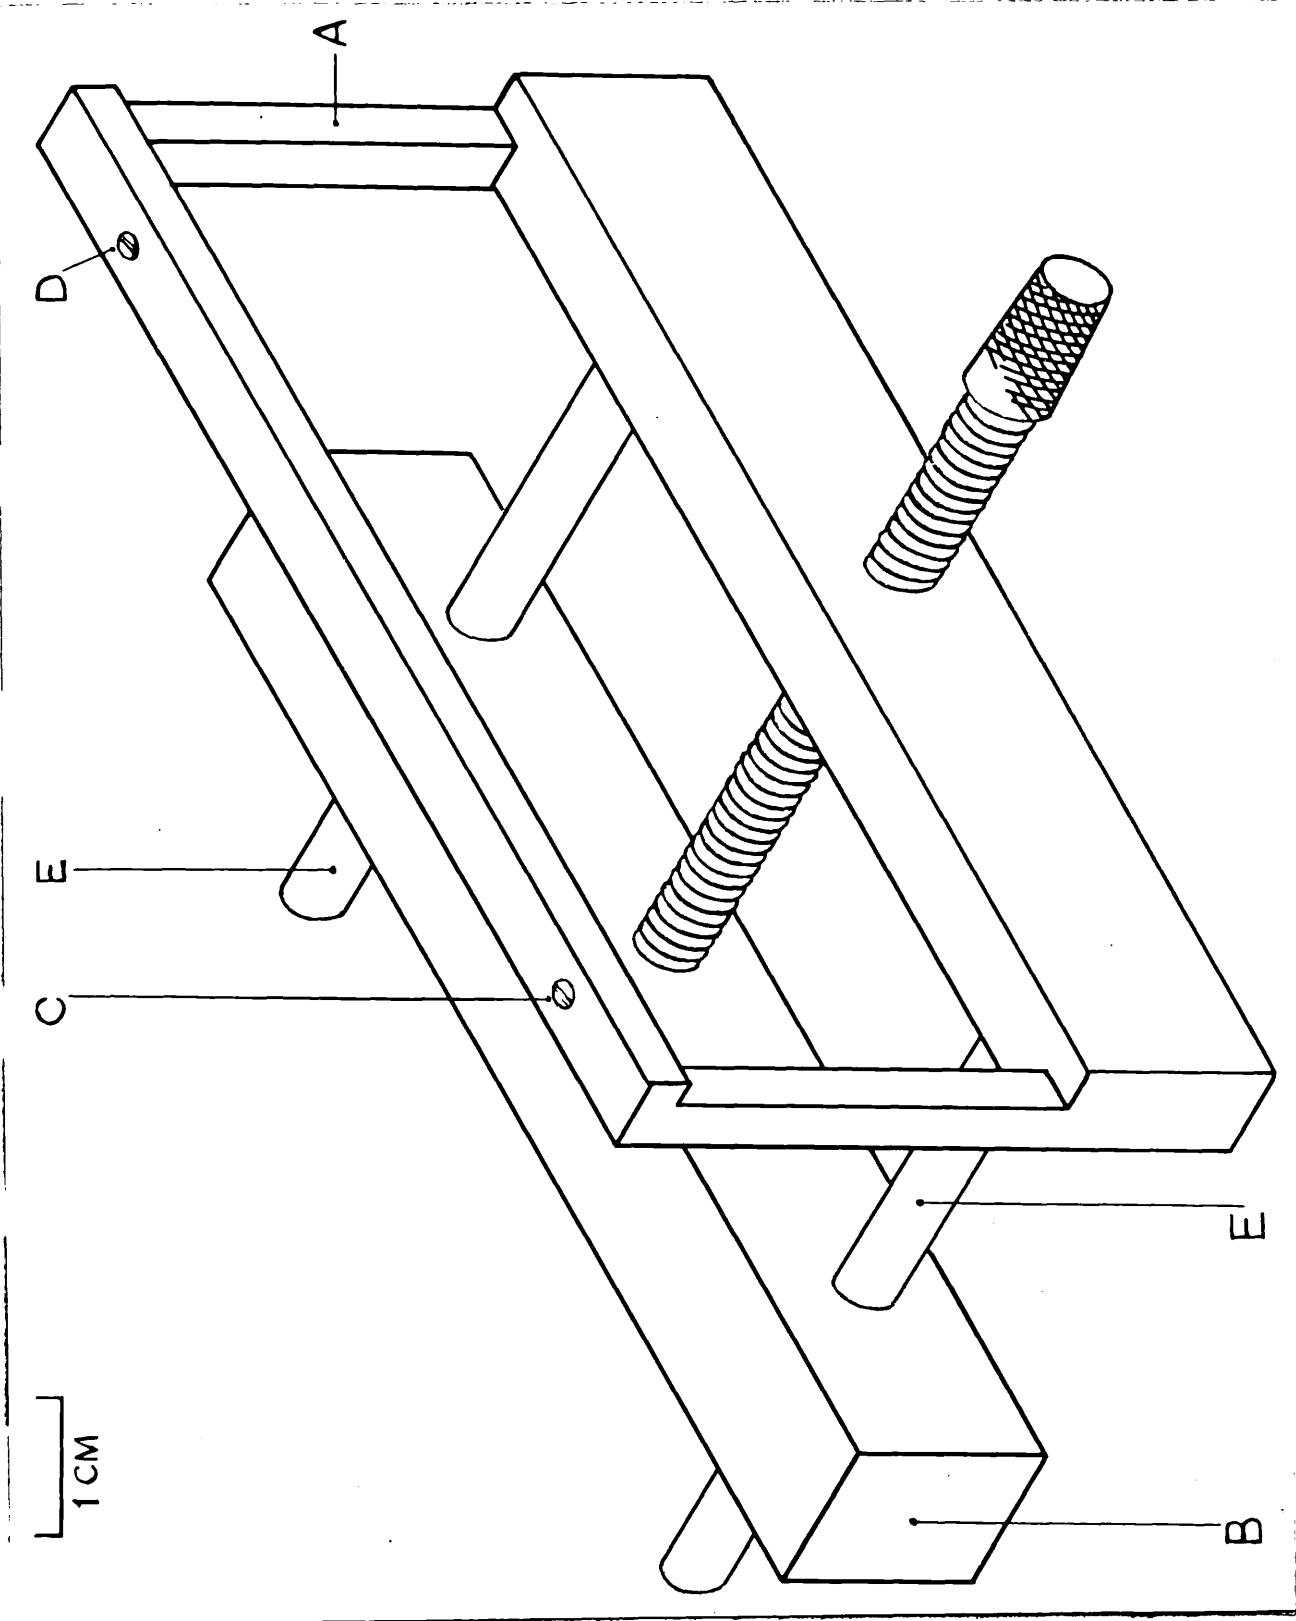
Isometric drawing of specimen holder for measurements in air.
